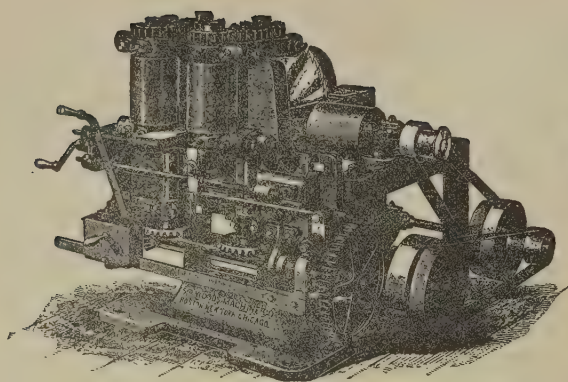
CIRCULAR RE-SAWING MACHINE.
